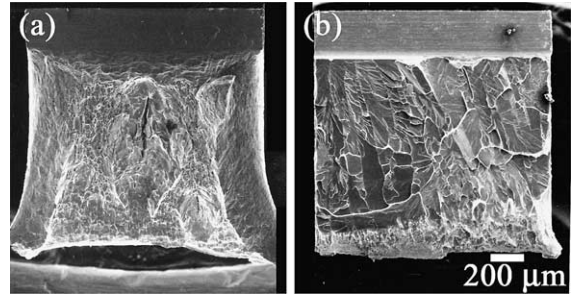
Fracture surface of (a) the base metal and (b) the weld metal at 77 K after irradiation.
